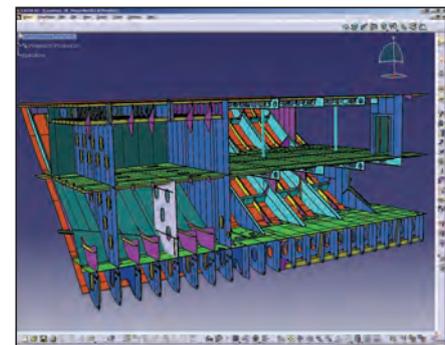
Shipbuilding Structure Detail Design (SDD) workbench.
